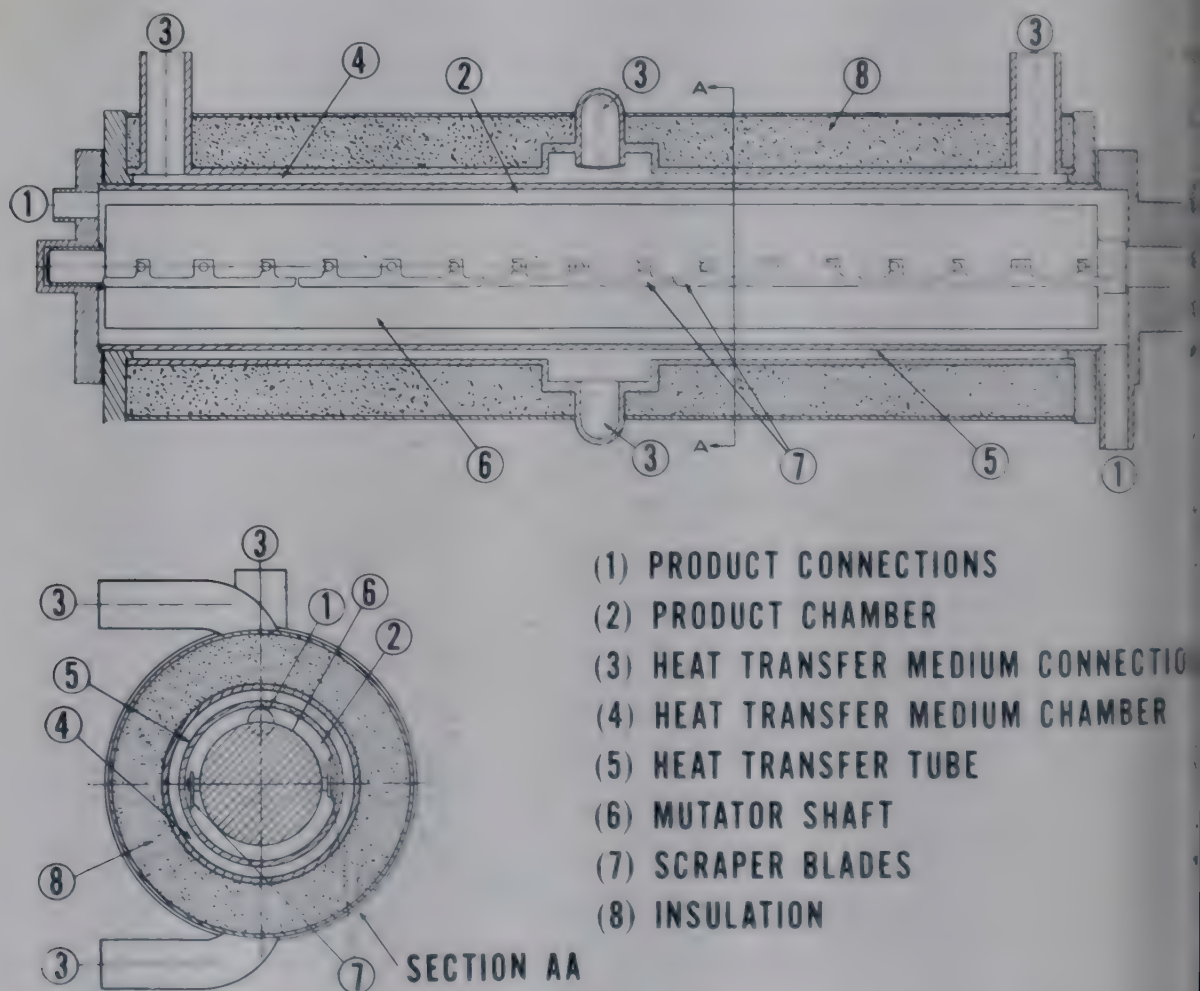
Cylinder of Votator chilling machine, cross and longitudinal section (courtesy of The Girdler Corp.).
